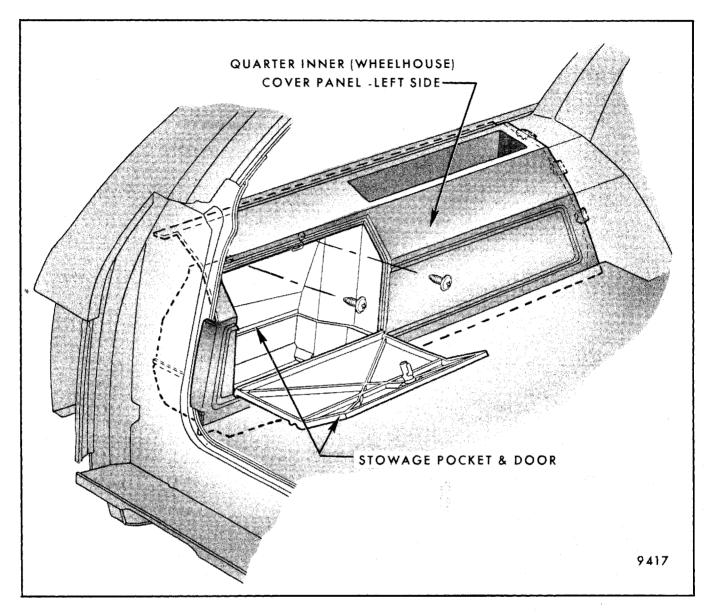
Quarter Wheelhouse Trim Cover and Stowage Pocket Assembly - B-35 Styles (Left Side)
